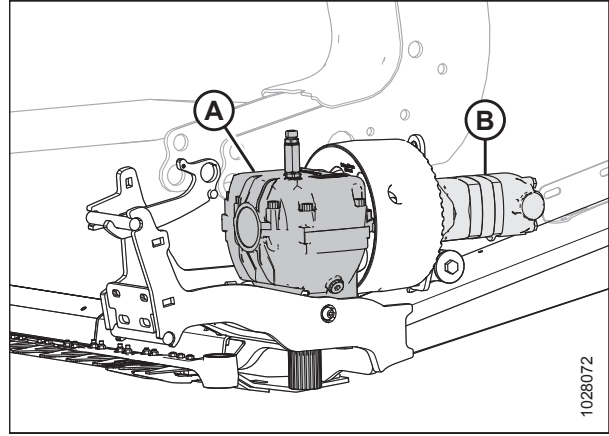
Left Side Knife Drive Box Shown – Right Side Similar
